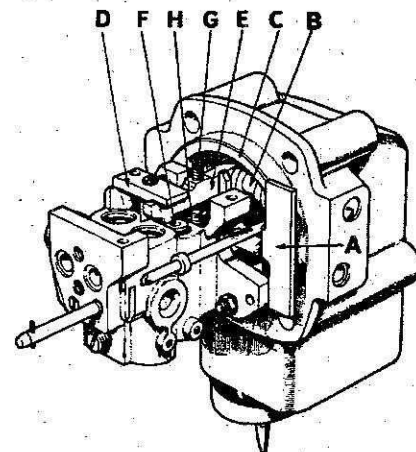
Using adjusting gage to check setting of traction control valve screw in rocker lever. Refer to text for procedure. Refer to Fig. 185 for legend.
